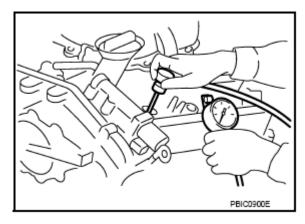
Installing Compression Gauge With Adapter Onto Spark Plug Hole Courtesy of NISSAN NORTH AMERICA, INC.
